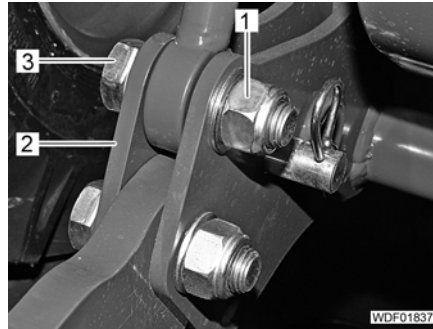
Fastening of the cylinder of the rear three-point linkage
